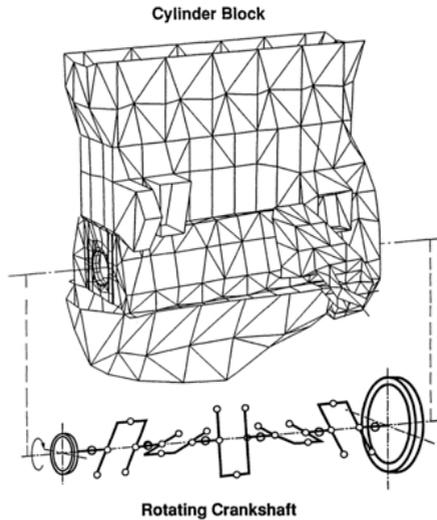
finite element model of a 5-cylinder engine and crankshaft [21]
